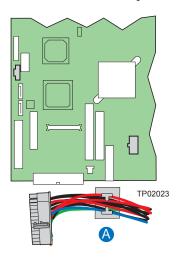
Attaching Main P1 Cable Bundle to Chassis Hook
